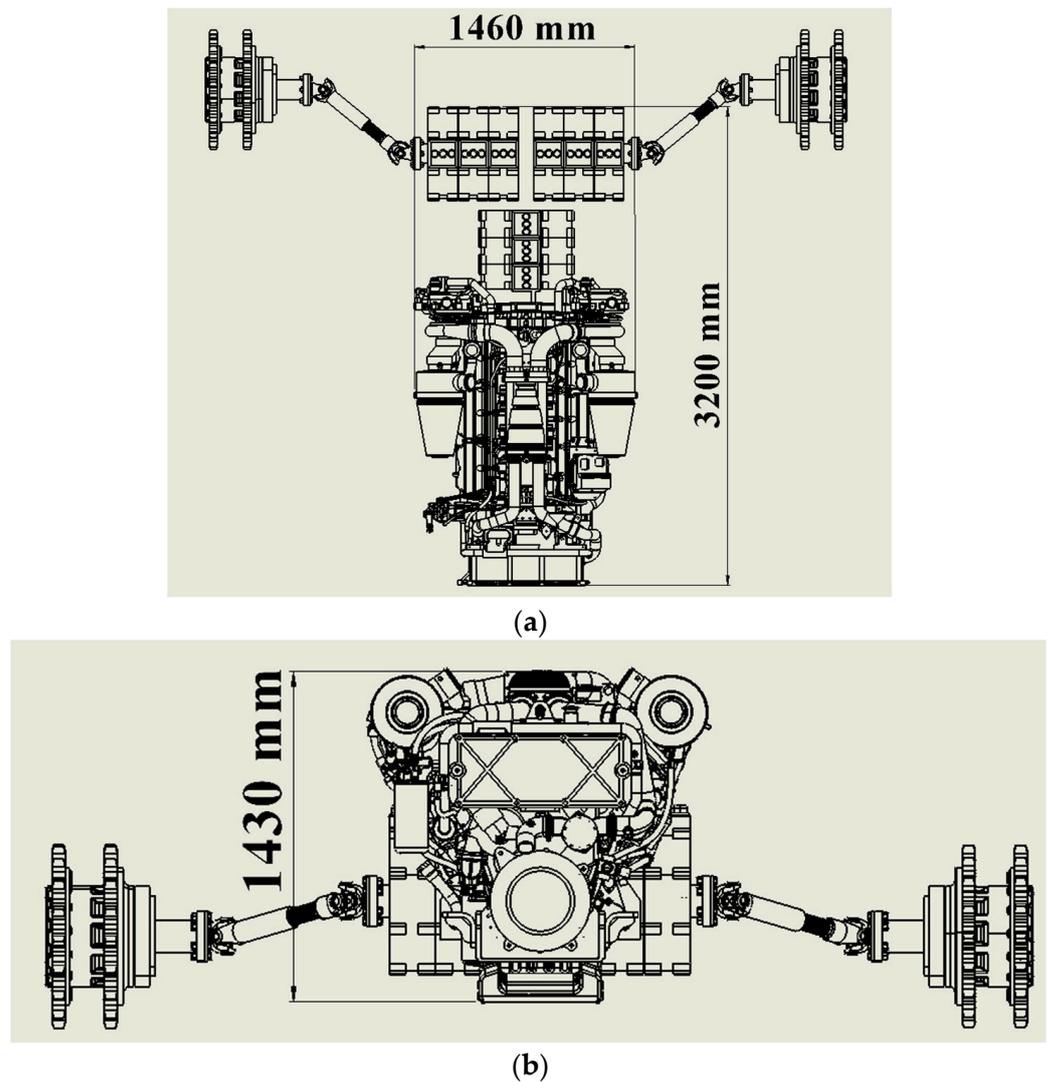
(a). Size of the dual drive power pack with a single diesel engine for a large MBT (Top View). (b) Size of the dual drive power pack with a single diesel engine for a large MBT (Side View).
